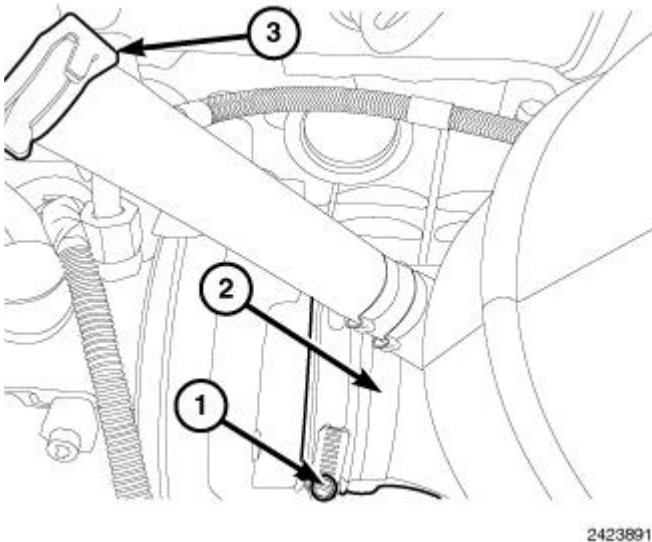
Breather Hose & Turbocharger Outlet Tube
